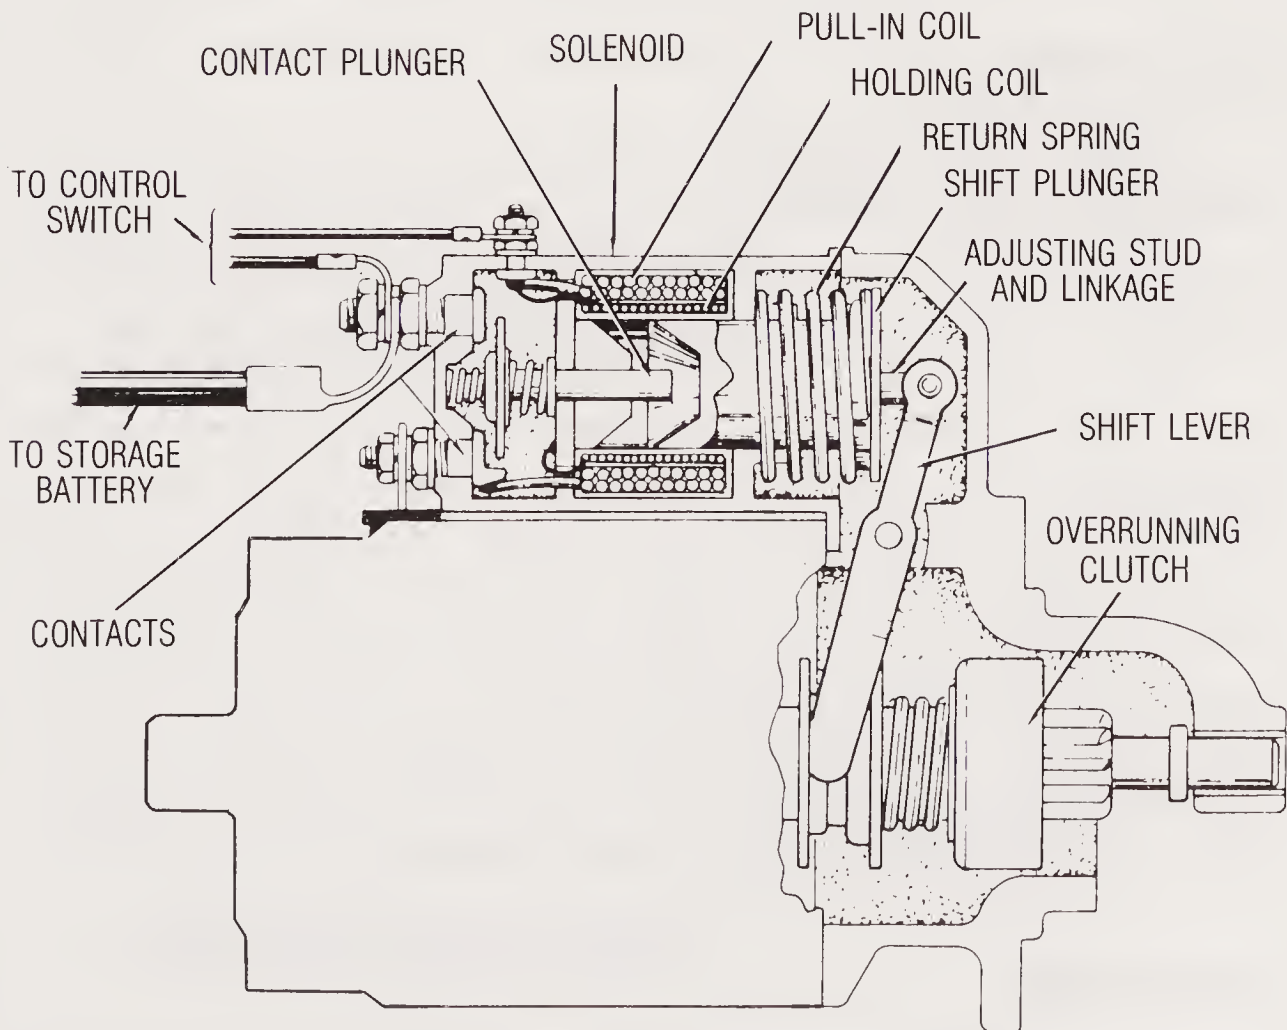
Arrangement of solenoid shift in clutch drive.
